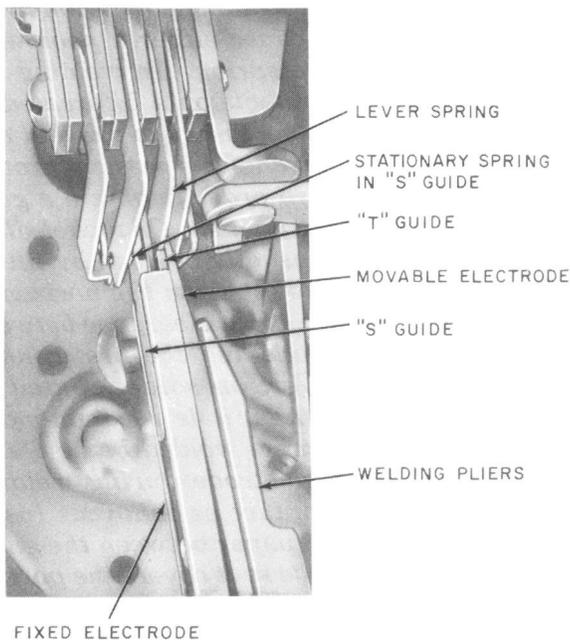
Welding Contact on Movable (lever) Spring of VON Assembly of 197-Type Switch Using 577A or 577B Welding Pliers
